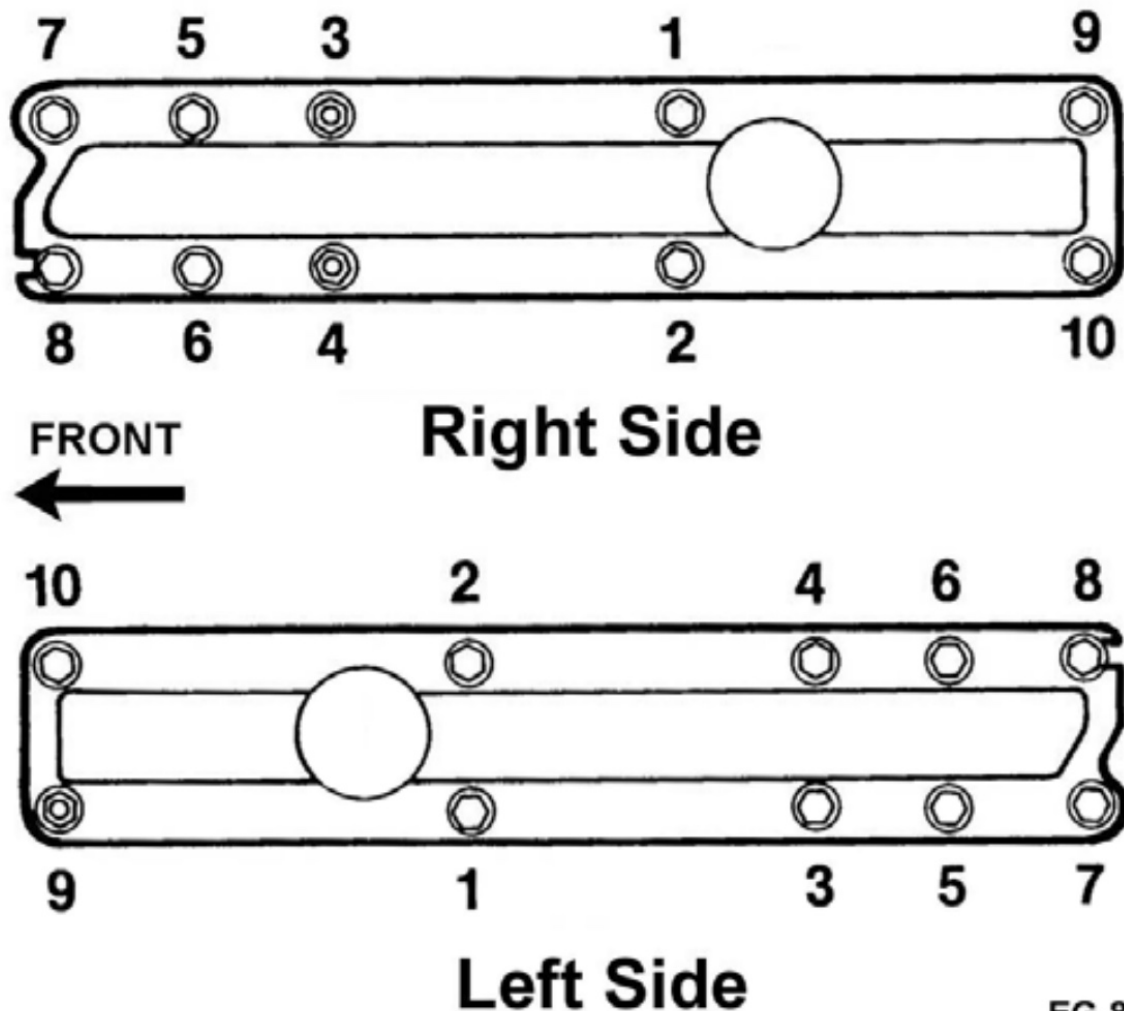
Exhaust Manifold Mounting Bolt Torque Sequence
